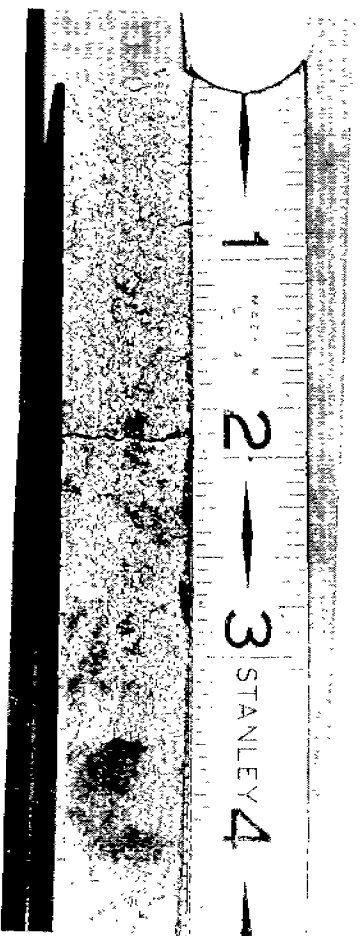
Edge and Fracture Views, Sheared Edge Specimen
